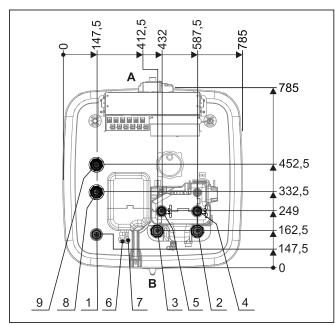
Dimensions, top of the device - Type ...04P50D/... 08P50D
